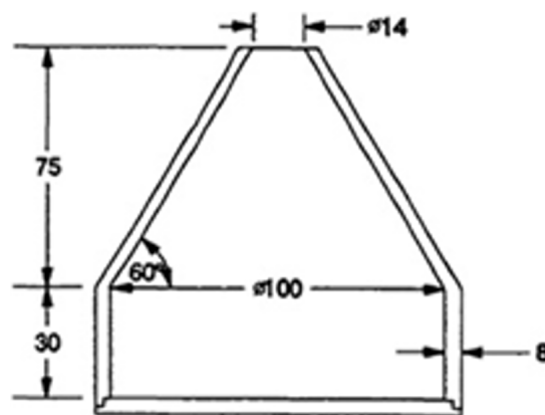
Permanent mold used to cast TATUR specimen (Dimensions are in mm) [24]
